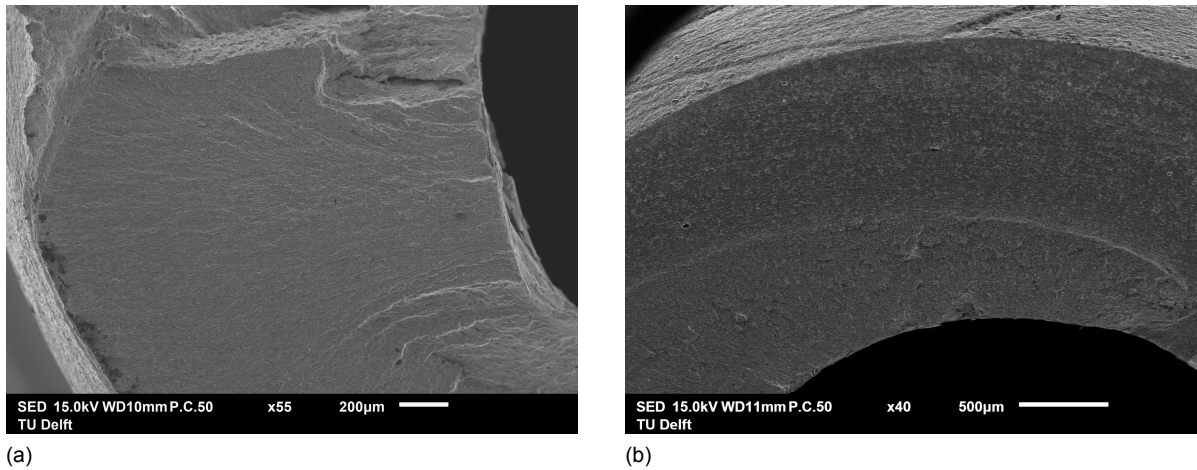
a) Low magnification overview of the area on the fracture surface of the smooth base metal test specimen, tested in hydrogen, where quasi-cleavage (QC) fracture propagated until the outside surface and b) of the top side of the fracture surface of the same specimen tested in 30 bar H₂ showing a transition between QC and microvoid coalescence fracture modes.
